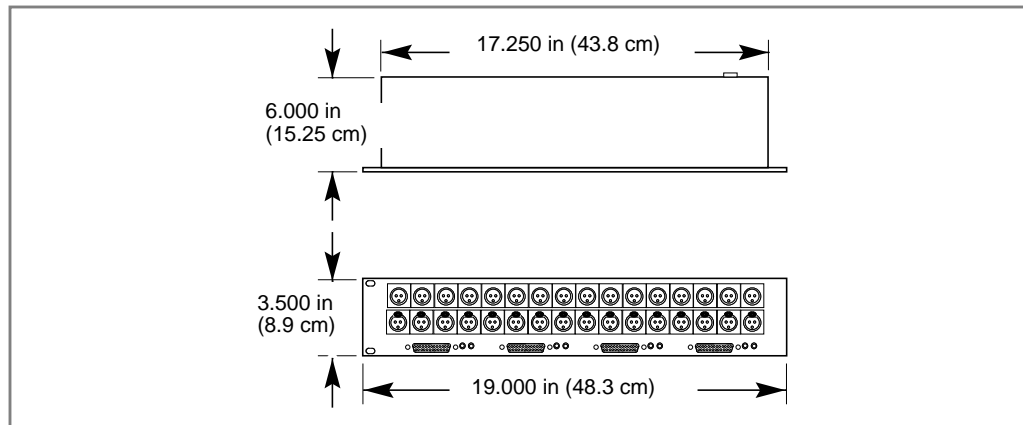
Dimensions of the XLR100 Audio Bypass Unit for Rack Mounting
